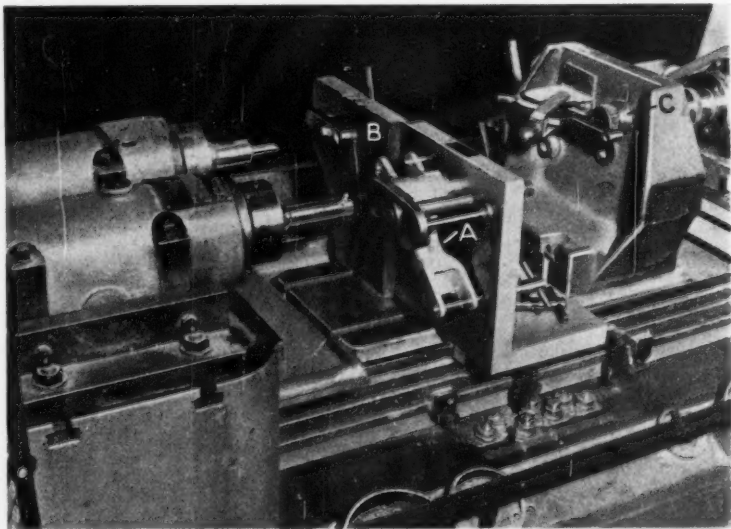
A Precimax 3-spindle Fine-boring Machine Equipped with Three Work Holding Fixtures
